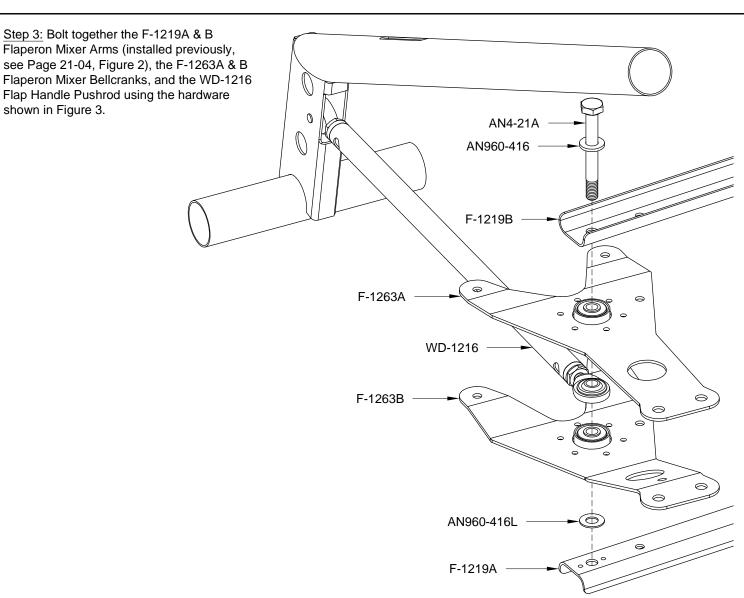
ATTACHING THE FLAPERON MIXER BELLCRANKS
